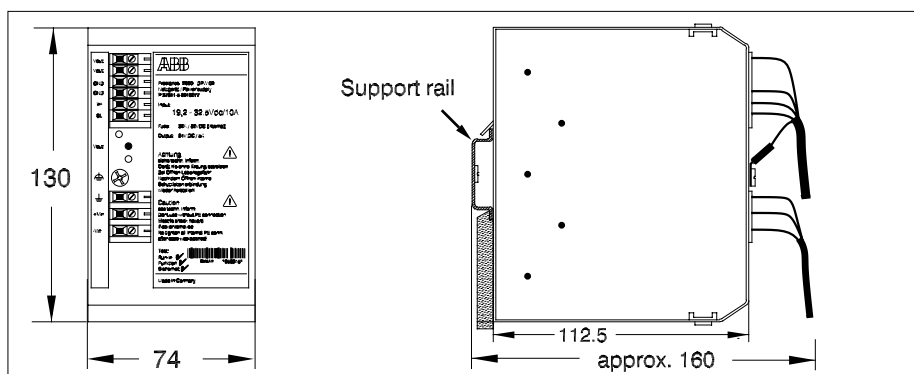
Dimensions and mounting depth of the power supply DPW 02 in mm (24 V DC)
